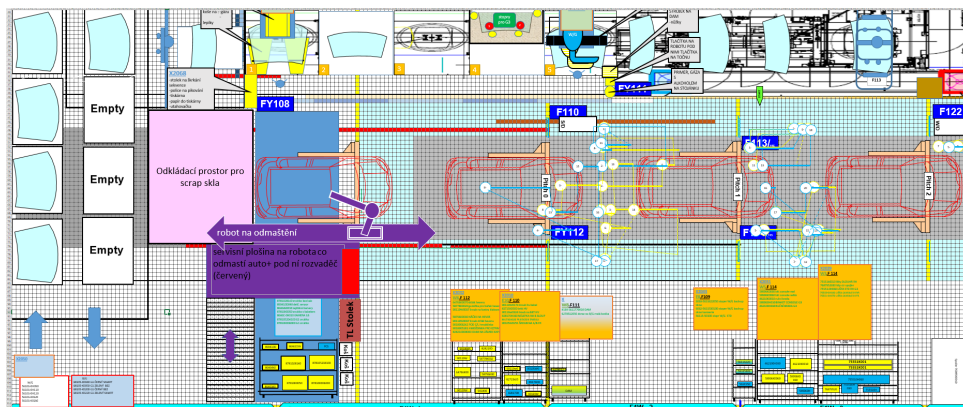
Modified layout of TMMCZ Assembly line for degreasing workplace.[62]
